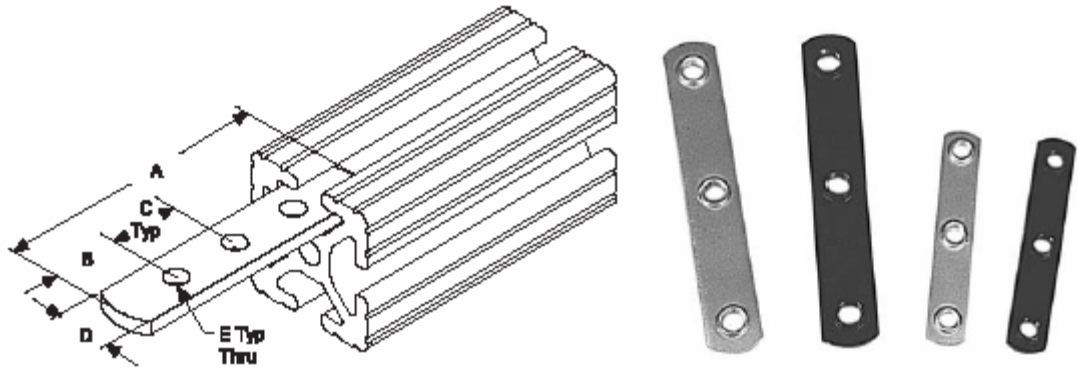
Specialized brackets that slide into the t-slots of standard 8020 extrusions that make it possible to attach pieces.
